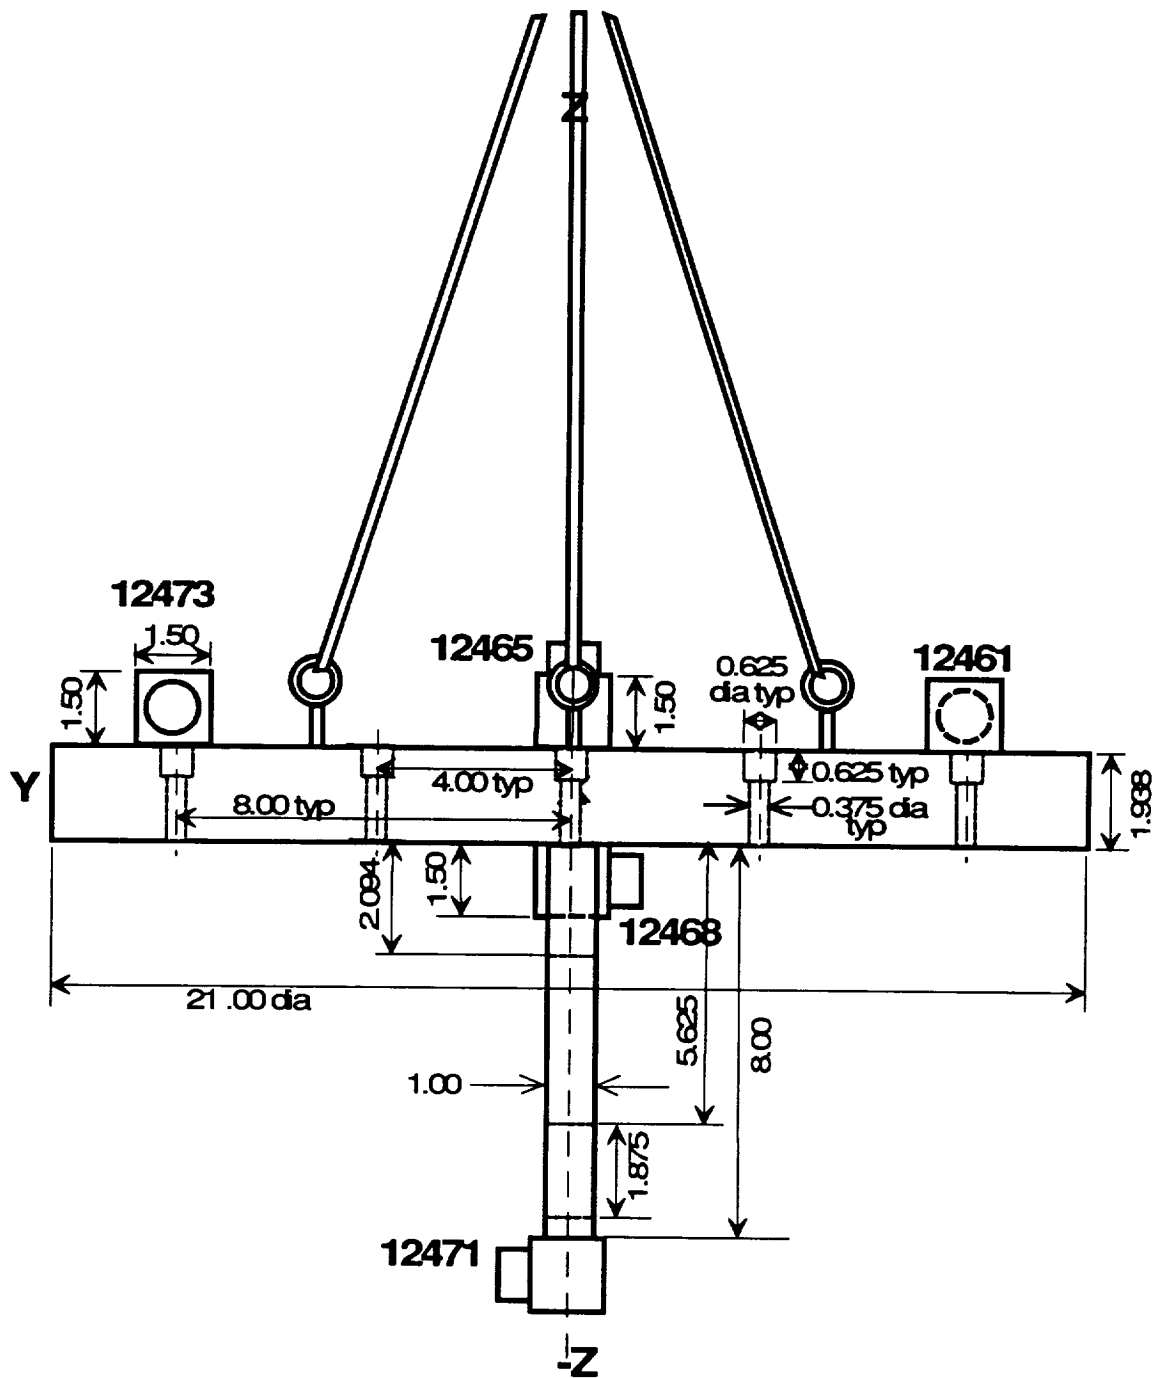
Detailed Drawing of Test Apparatus Platform with Accelerometers
